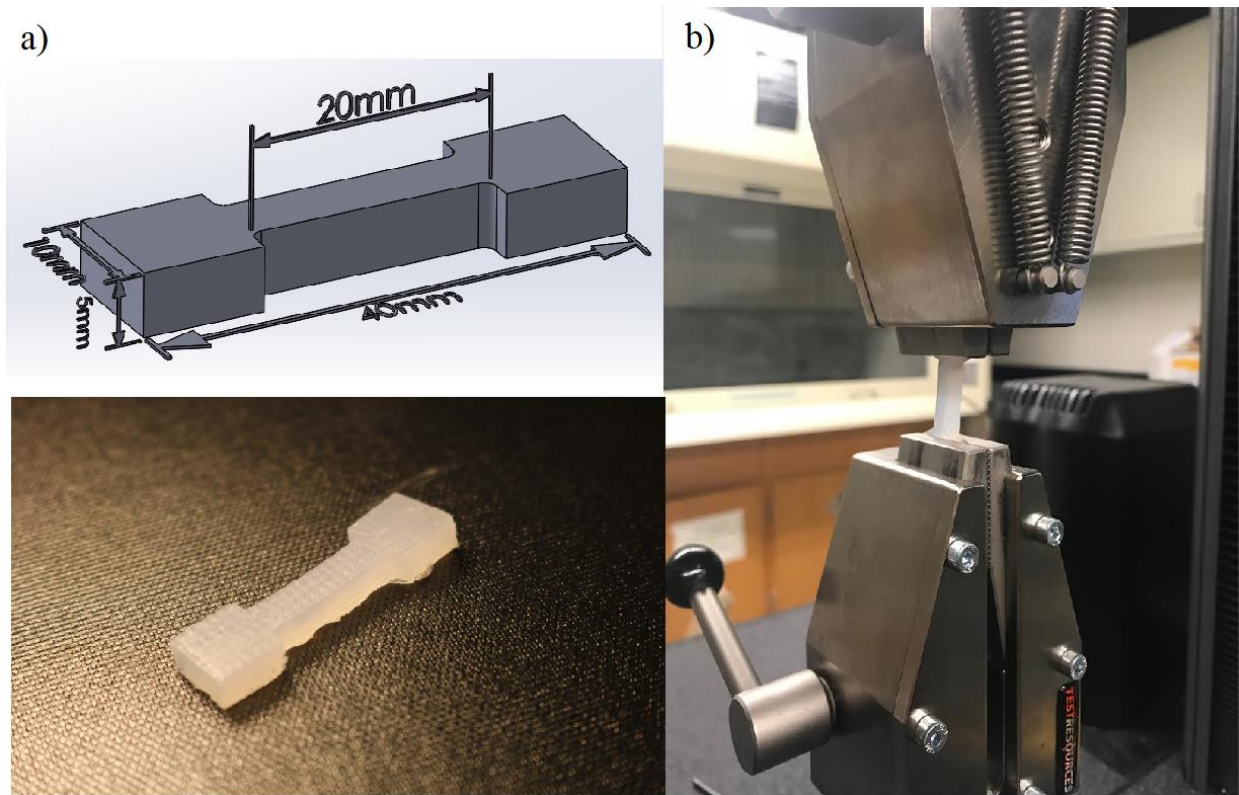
a) The dimension and photo of a sample. b) Sample on INSTRON machine
